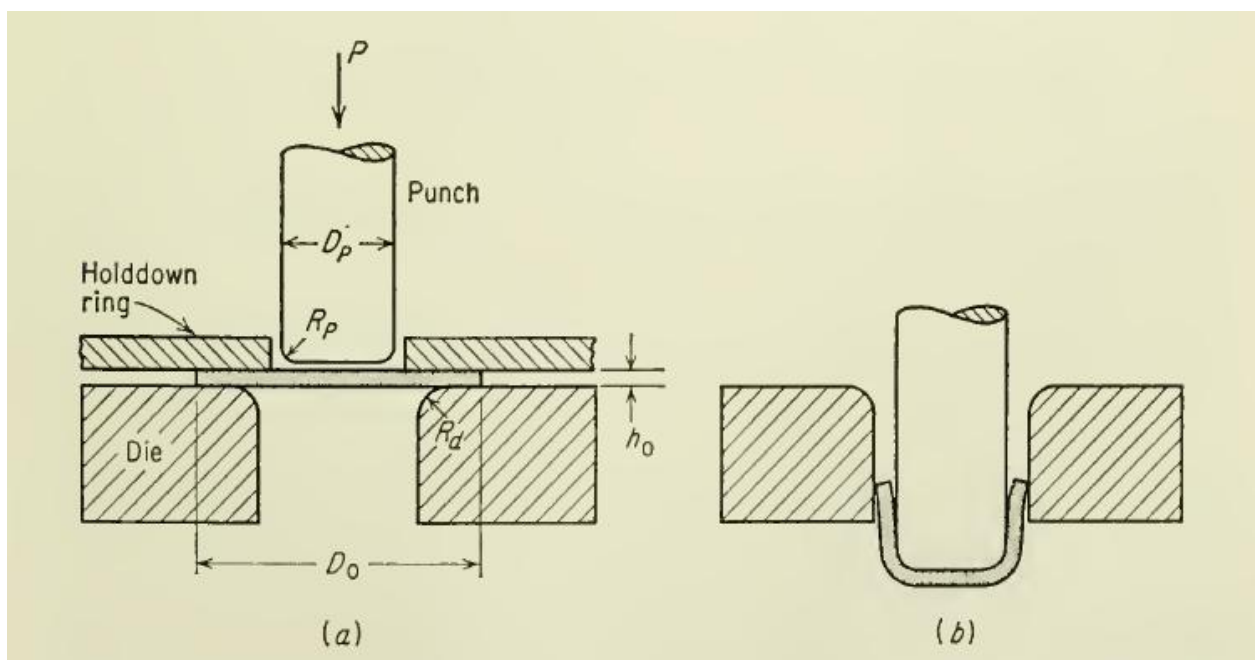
Deep drawing of a cylindrical cup (a) Before drawing (b) After drawing [29]
